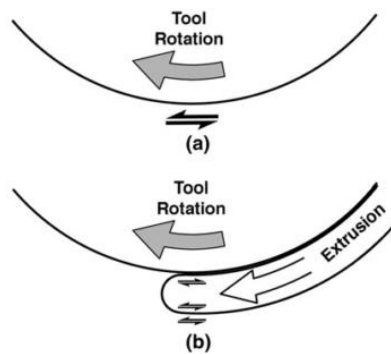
Schematic of the shear expected (a) for the conventional view of continuous material flow during FSW and (b) within material being extruded around the tool faster than the tangential tool speed due to an off-centred (eccentric) tool for the indicated region in Figure 2-4(d) [59].
